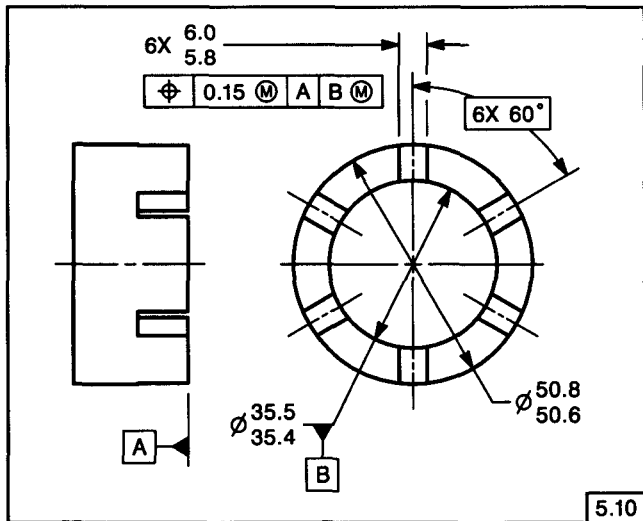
POSITIONAL TOLERANCING OF SLOTS
